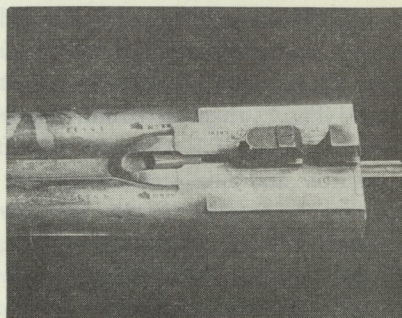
The gunsmith next welded additional metal onto the breech for lugs and locks.
